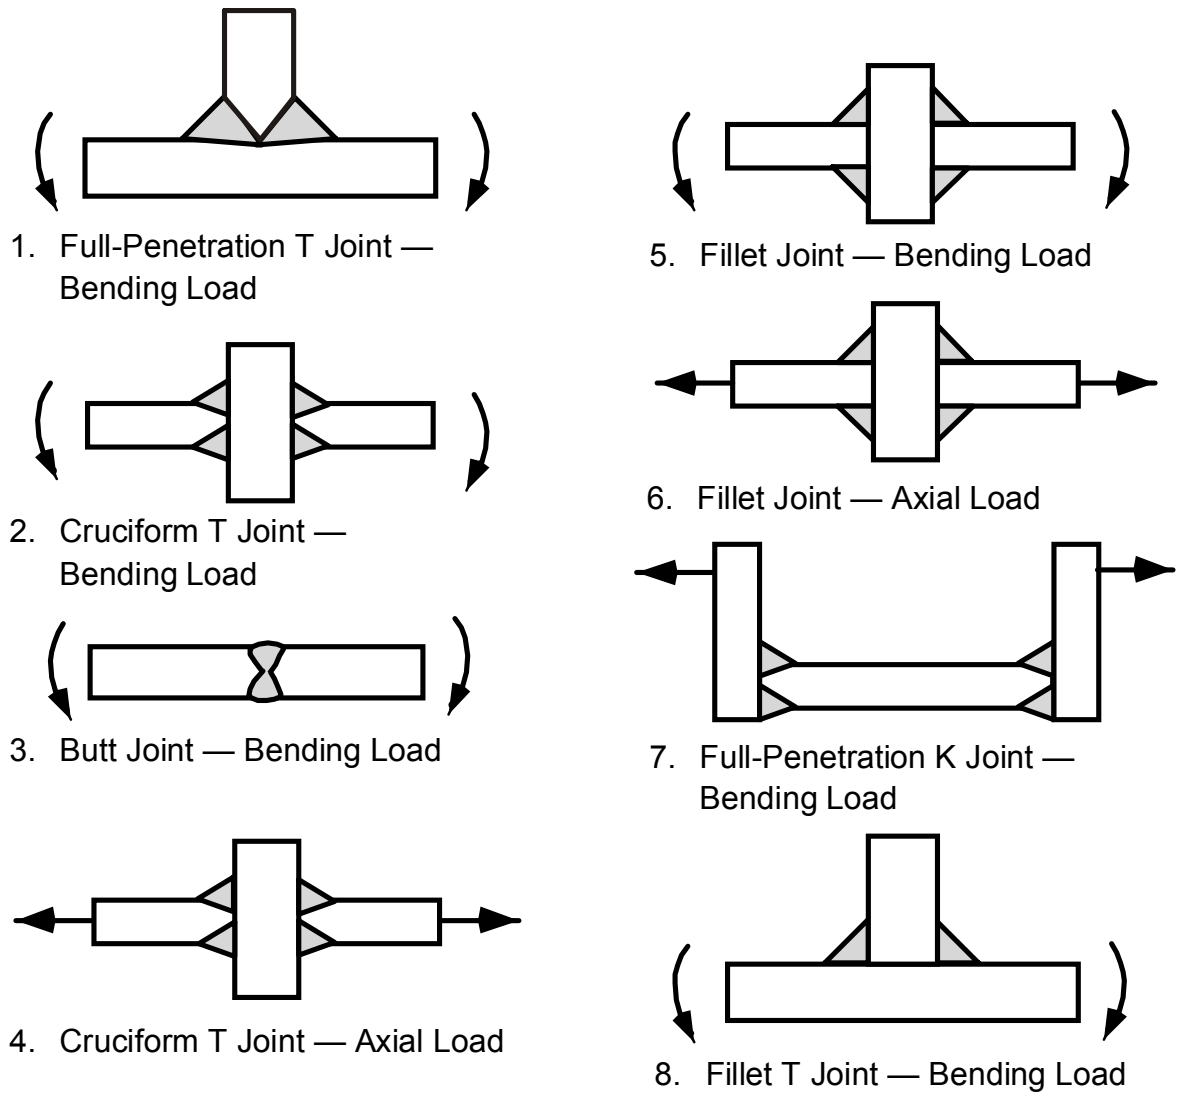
Typical weld joints used for fatigue testing.⁶
